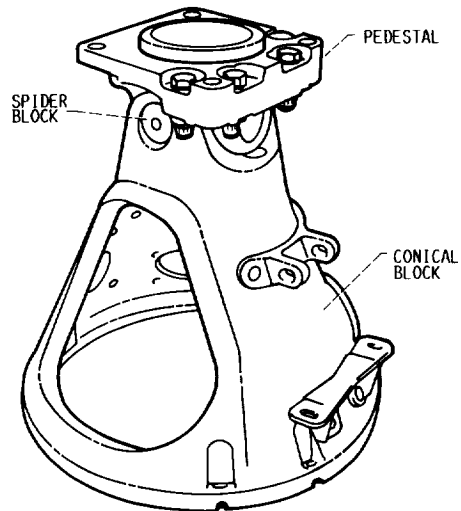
ENGINE MOUNT GIMBAL ASSEMBLY.
